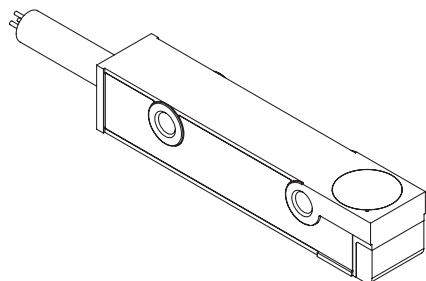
Limit switch for linear modules HM-S and linear tables HT-S
